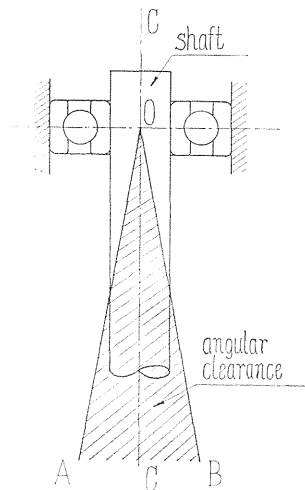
Angular clearance of deep-grooved single-row ball bearing.
